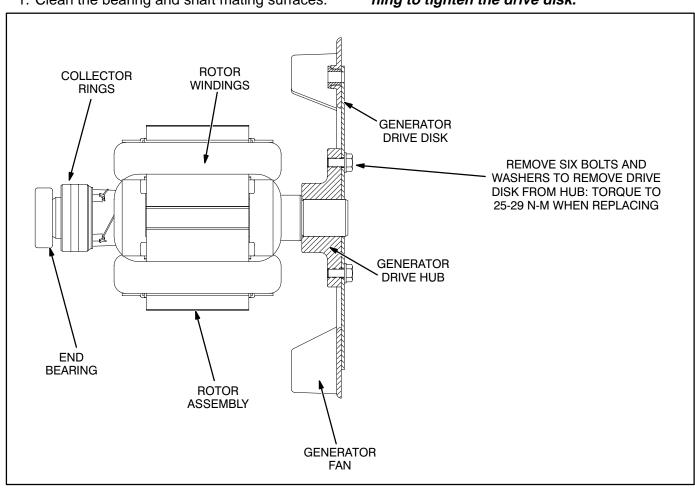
ROTOR ASSEMBLY COMPONENTS
